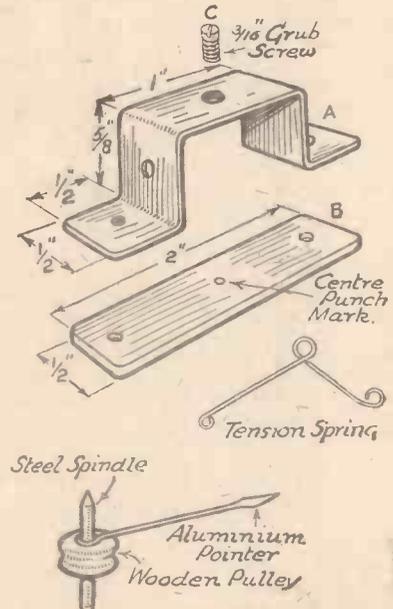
The above sketches give all constructional details for the more important parts of the meter described.
